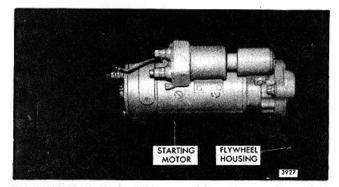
Sprag Overrunning Clutch Type Starting Motor Mounting
